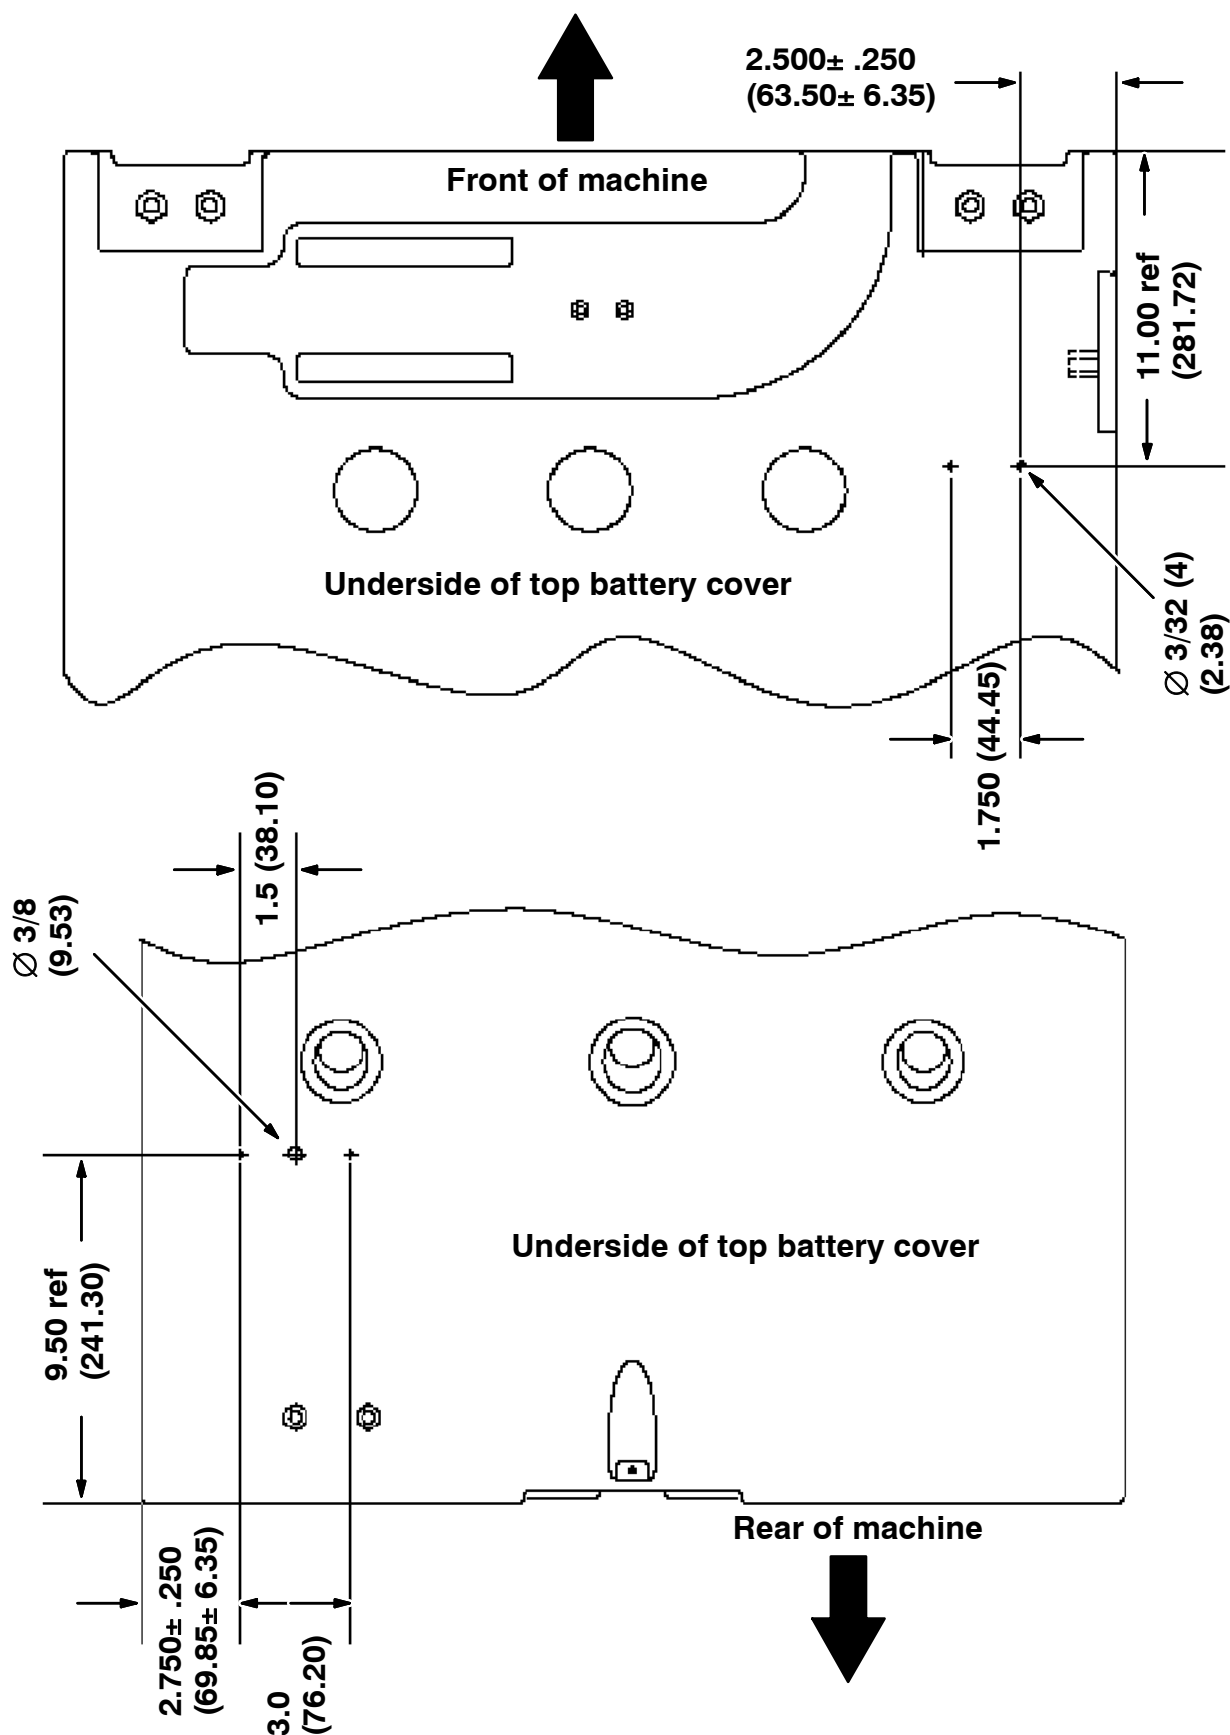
CLEAN-OUT WAND MOUNTING CLIP MOUNTING LOCATIONS
